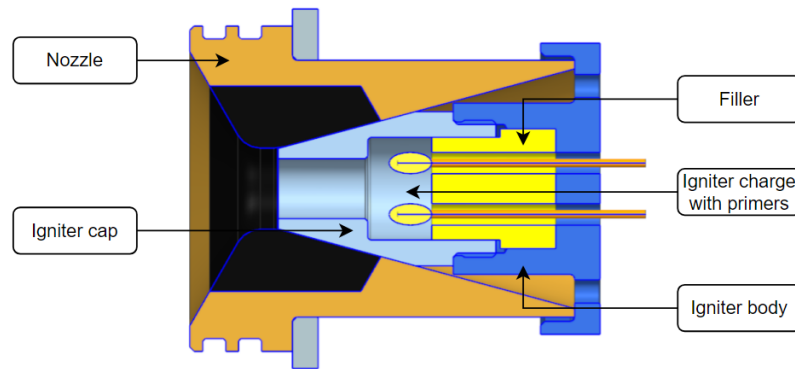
Cross sectional view of the A2 motor nozzle igniter first iteration assembly
